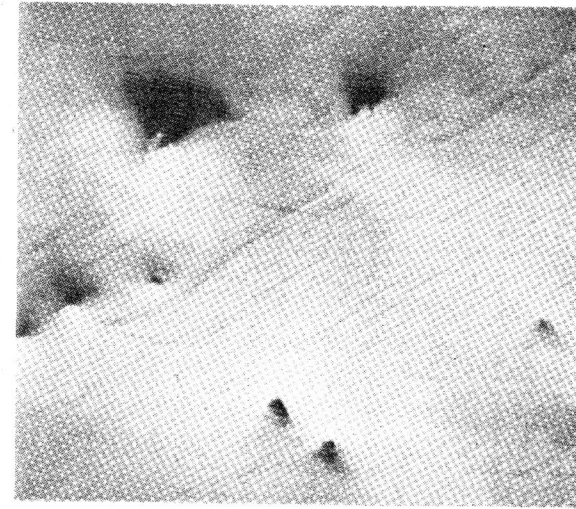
Fractograph of 0.02% oxygen, decarburized iron broken at 78°K. Intergranular fracture. Note extreme smoothness of fracture surface and general absence of cleavage steps.
